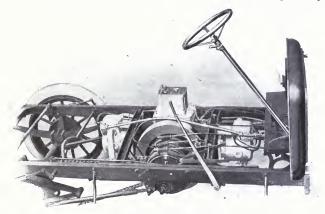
Side View of Part of Chassis of Reo Car. Showing Constriction-Band Clutches and Operating Rods. Reo Motor Car Company, Lansing, Mich.
